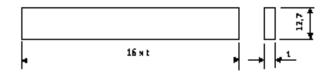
Dimensions of ASTM D790 Bending Test Specimen
